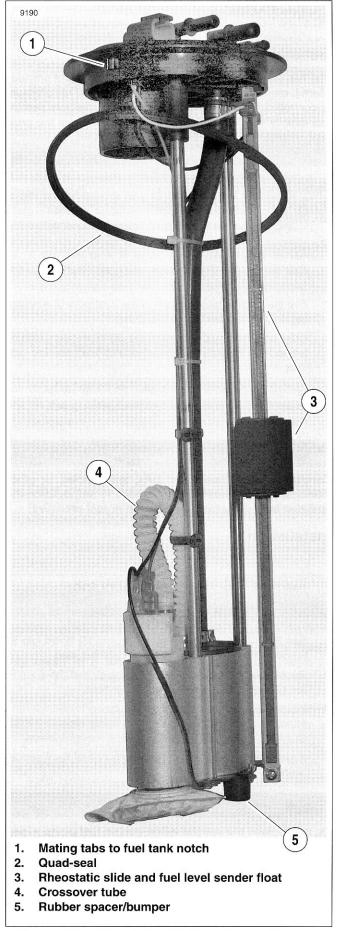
Fuel Pump/Filters/Fuel Level Sender Assembly
